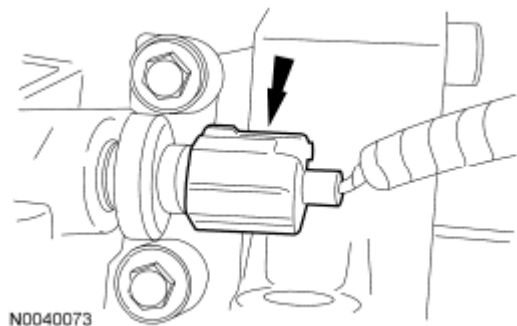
Locating Engine Oil Pressure Switch Electrical Connector
